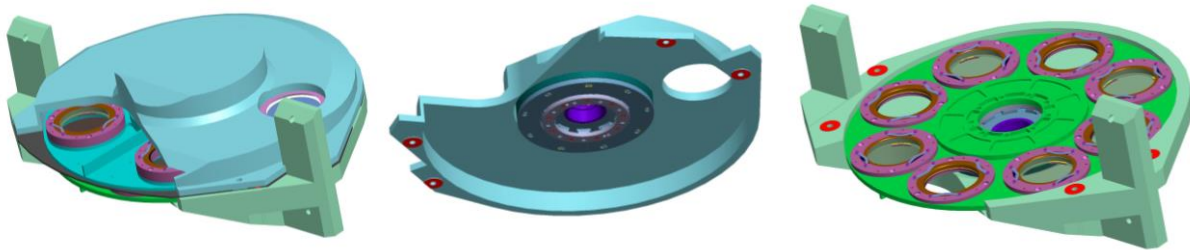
The PP1 wheel assembly (left), the top structure that mount the ICAR for the ADC wheel (middle) and the PP1 wheel on the bottom structure (right).
